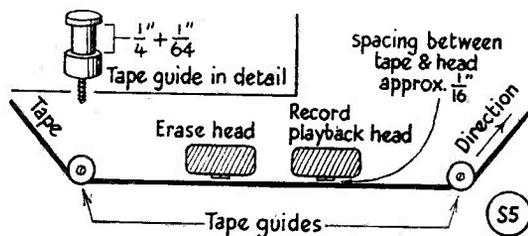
Tape layout and tape guide in detail. Factors affecting tape routing and rewind are explained in the text.
